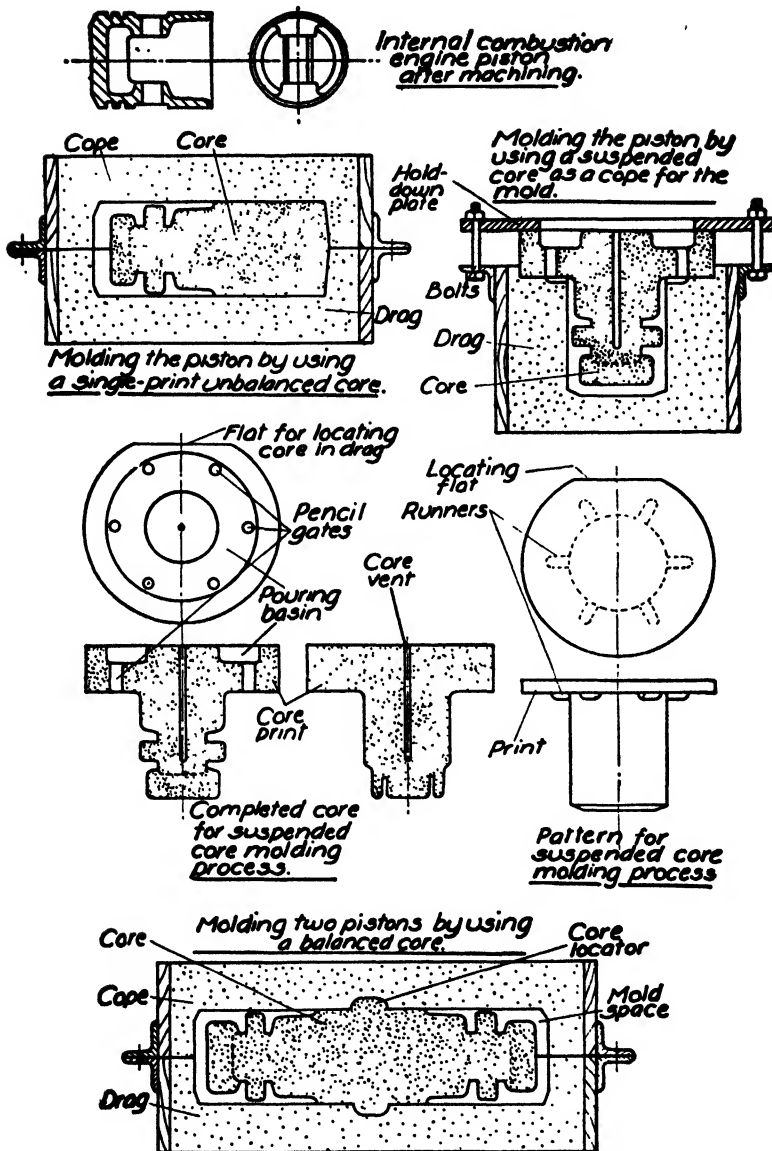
Methods of Molding an Internal Combustion Engine Piston.
